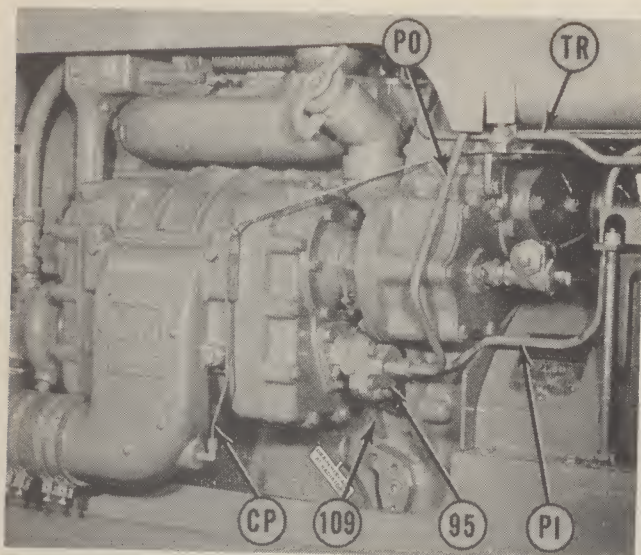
Primary fuel supply pump which is mounted on the blower is driven by the lower rotor shaft of the blower.
